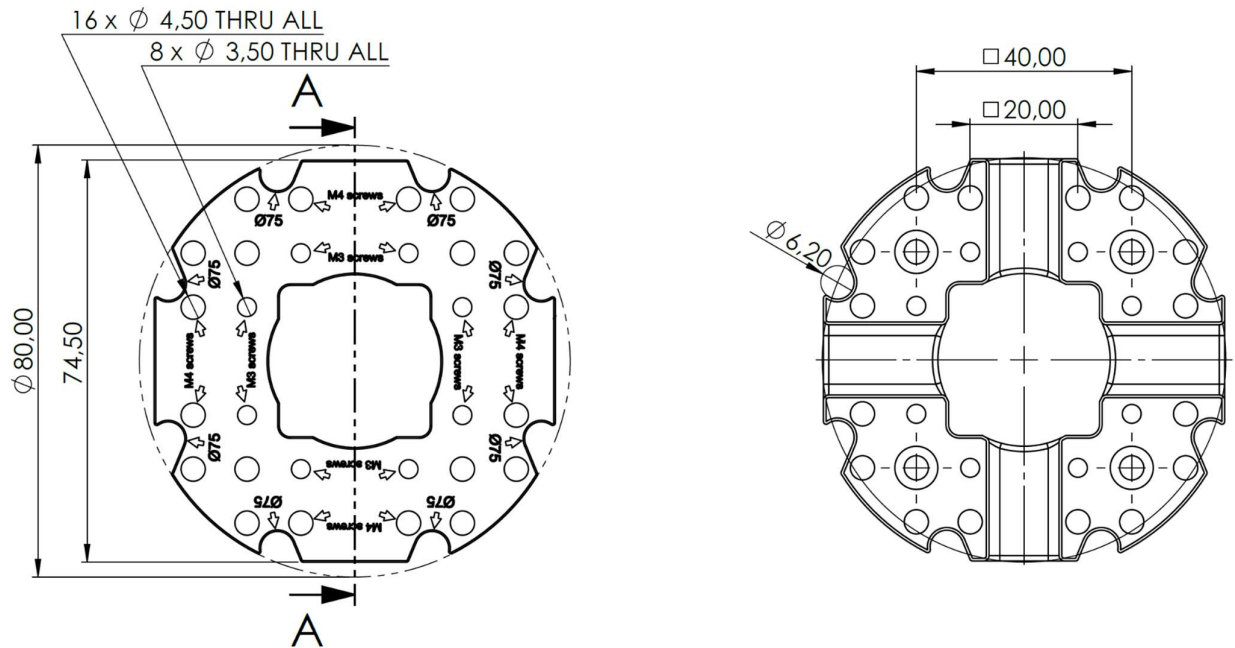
CAD drawing of the top flange of the QCage.64 standard configuration (incl. magnetic shielding). All dimensions are given in mm.
